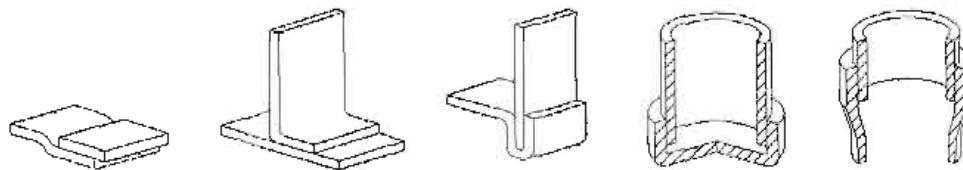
Some common joint designs for assembling parts by brazing.
